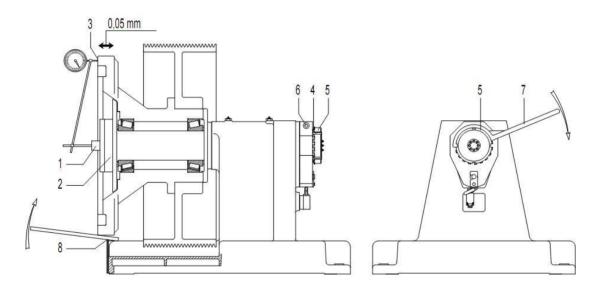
Schematic diagram for adjustment of the die holder bearing
